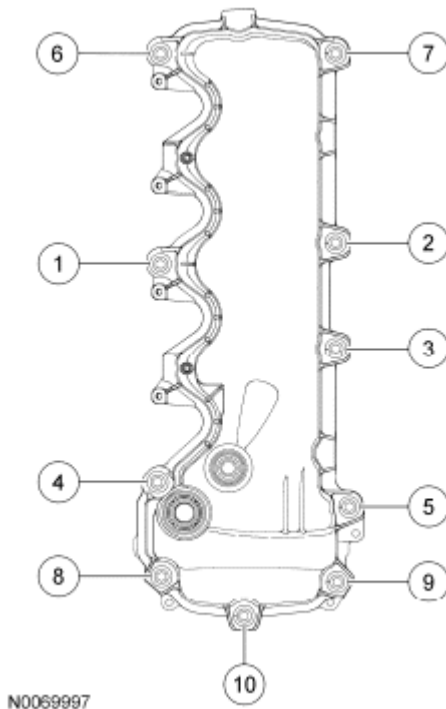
Identifying Cylinder Head Bolts Tighten Sequence
